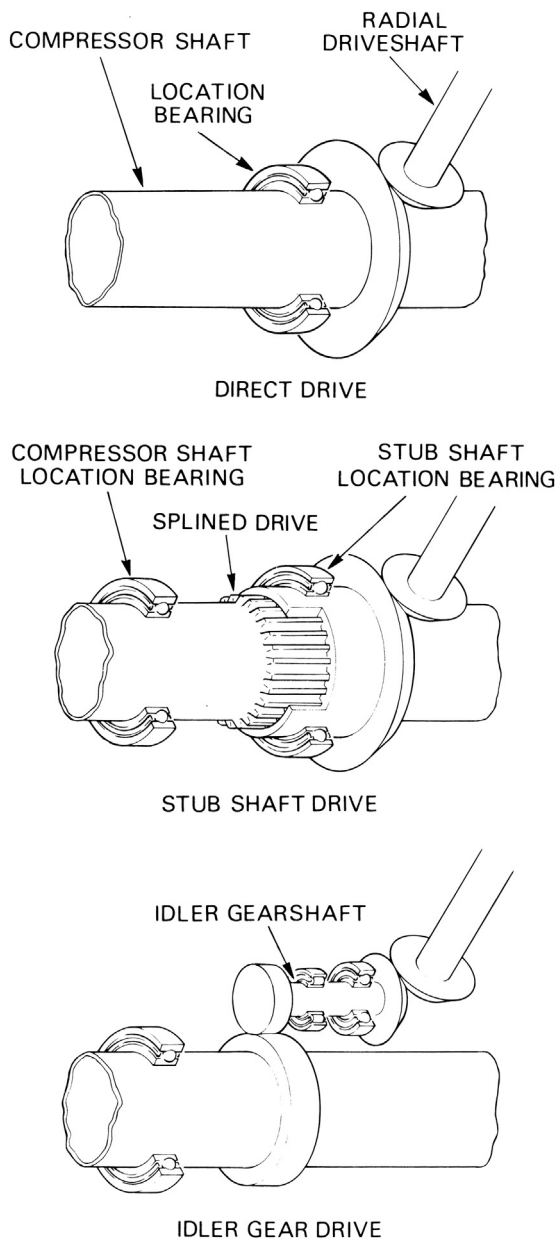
Mechanical arrangement of internal gearboxes. (Source: Rolls Royce.)
